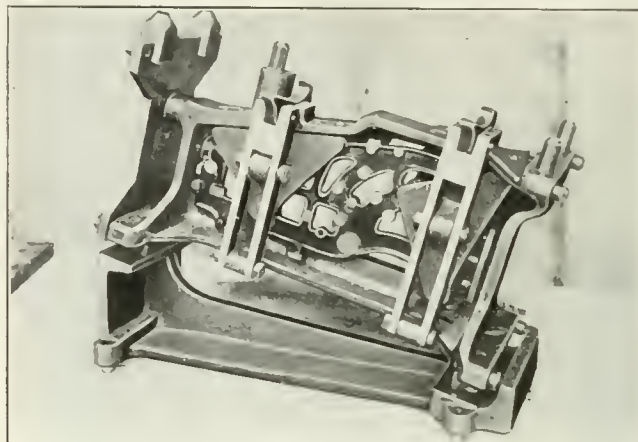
Jig for Drilling Edge Holes in the Side Frame, Provided with Angle Knee as shown for Drilling Inclined Holes
